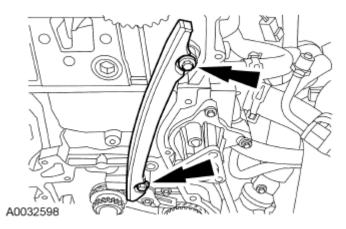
Locating Timing Chain Guide Bolts Courtesy of FORD MOTOR CO.
